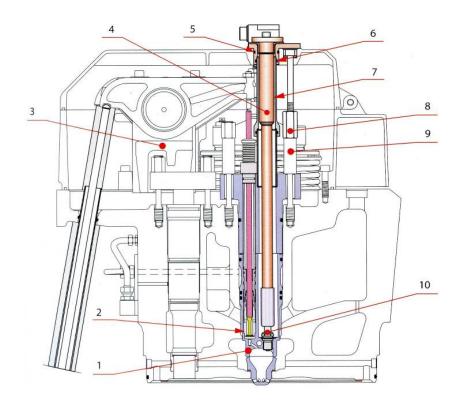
The pre-chamber, installed in the cylinder head of a Wärtsilä gas engine, type W34SG.
